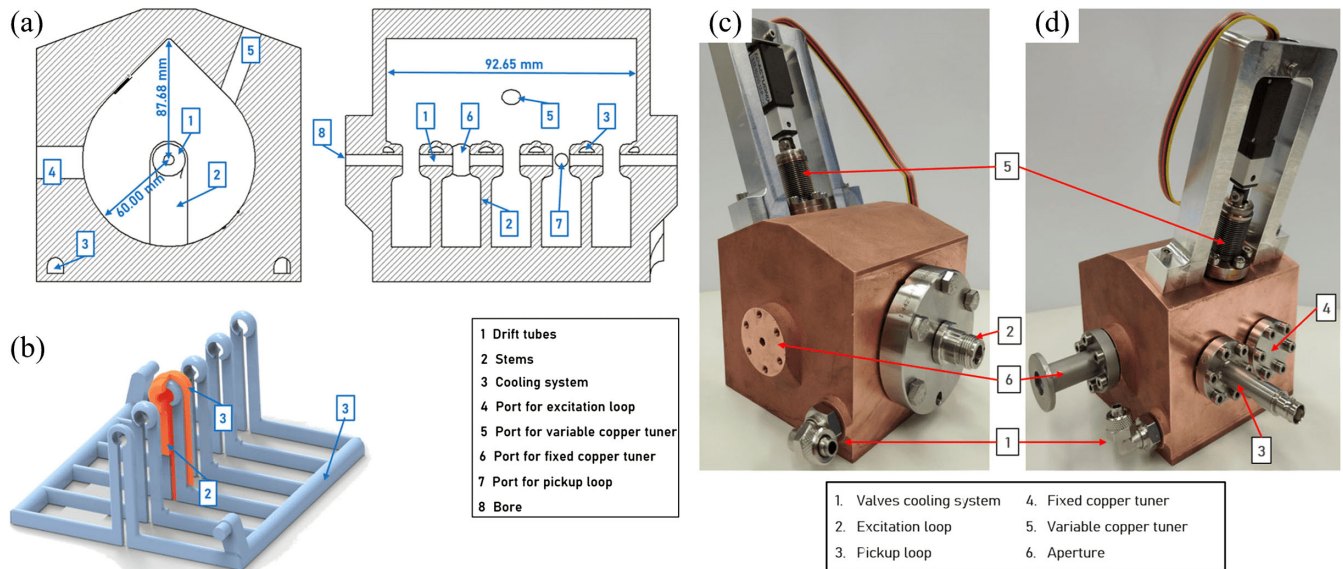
Design of (a) DTL cavity and (b) cooling system and (c) front and (d) rear view of the fully equipped prototype [154].
